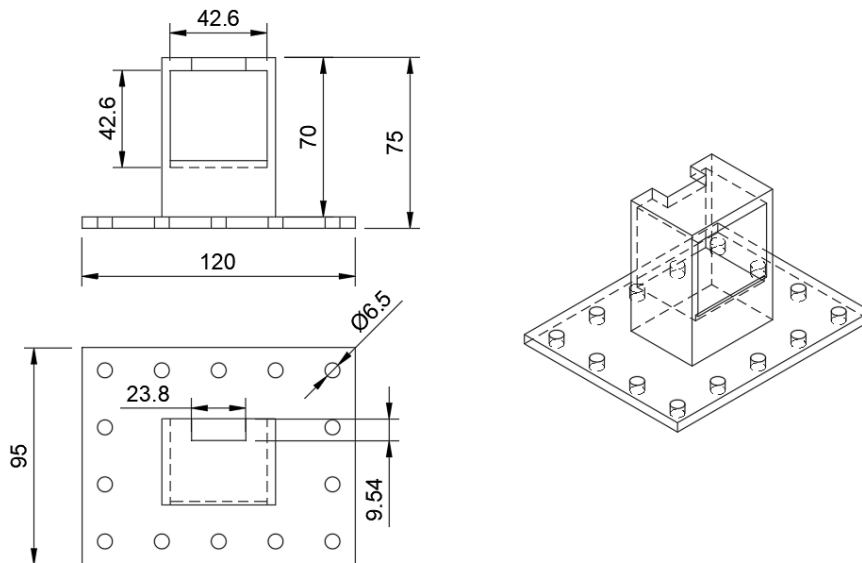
Technical drawing of motor mount used to position motors in line with the knob from the y-direction translation stage. The mount is fixed to the optical board using 1/4"-20 screws. All dimensions are given in millimeters.
